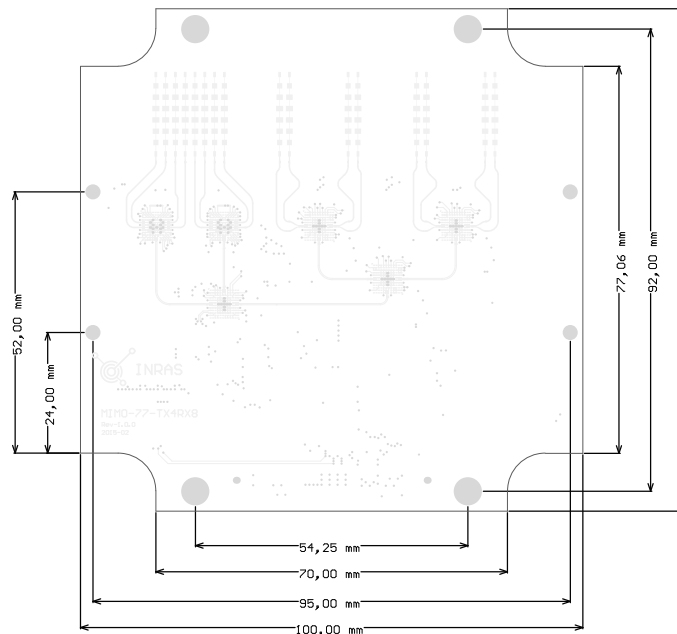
Dimensions of the MIMO frontend including the position of the mounting holes.
